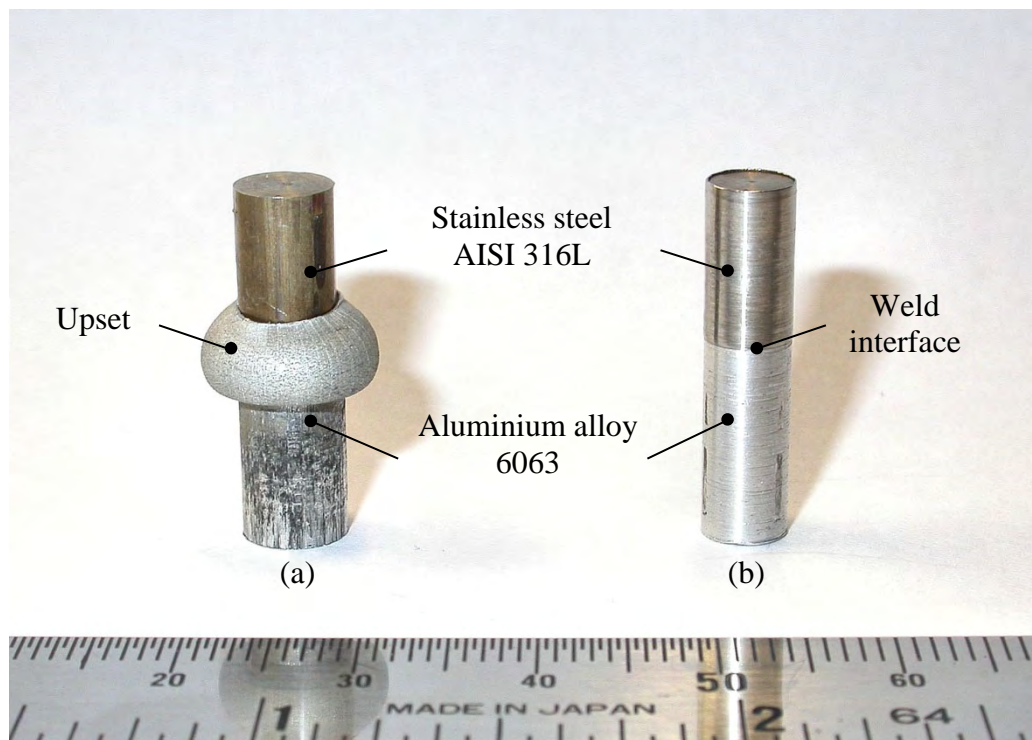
Successful bimetallic components formed by forge welding at $T_w = 450\text{ }^\circ\text{C}$ and $F_w = 8\text{ mm}$ that (a) the upset is present, and (b) the upset is removed.
